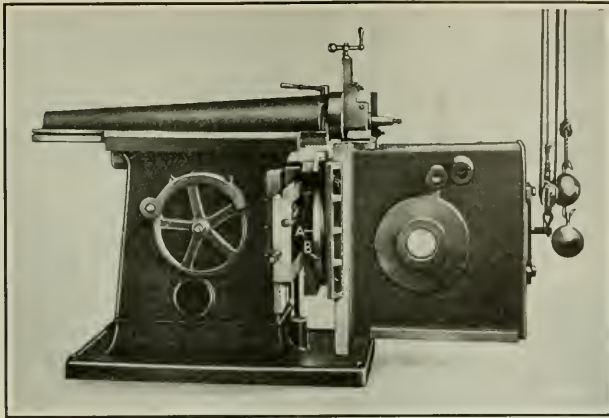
Fixture used in holding Column Casting of a Shaper for planing Four Sides of the Work at a Single Setting
